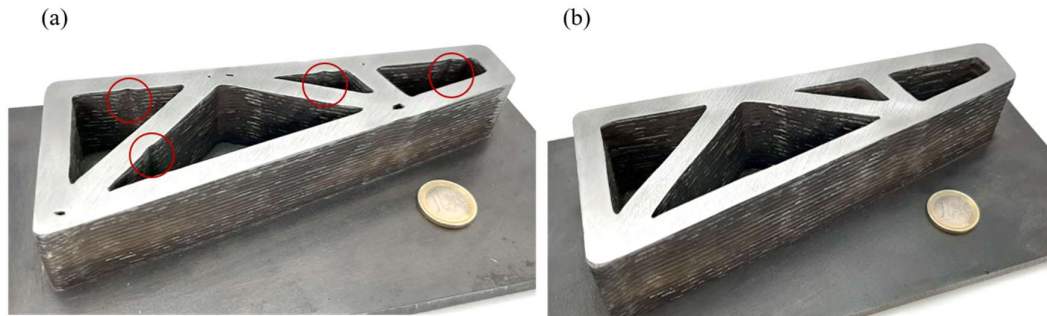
The metal parts after face milling: (a) standard tool path and (b) proposed tool path
